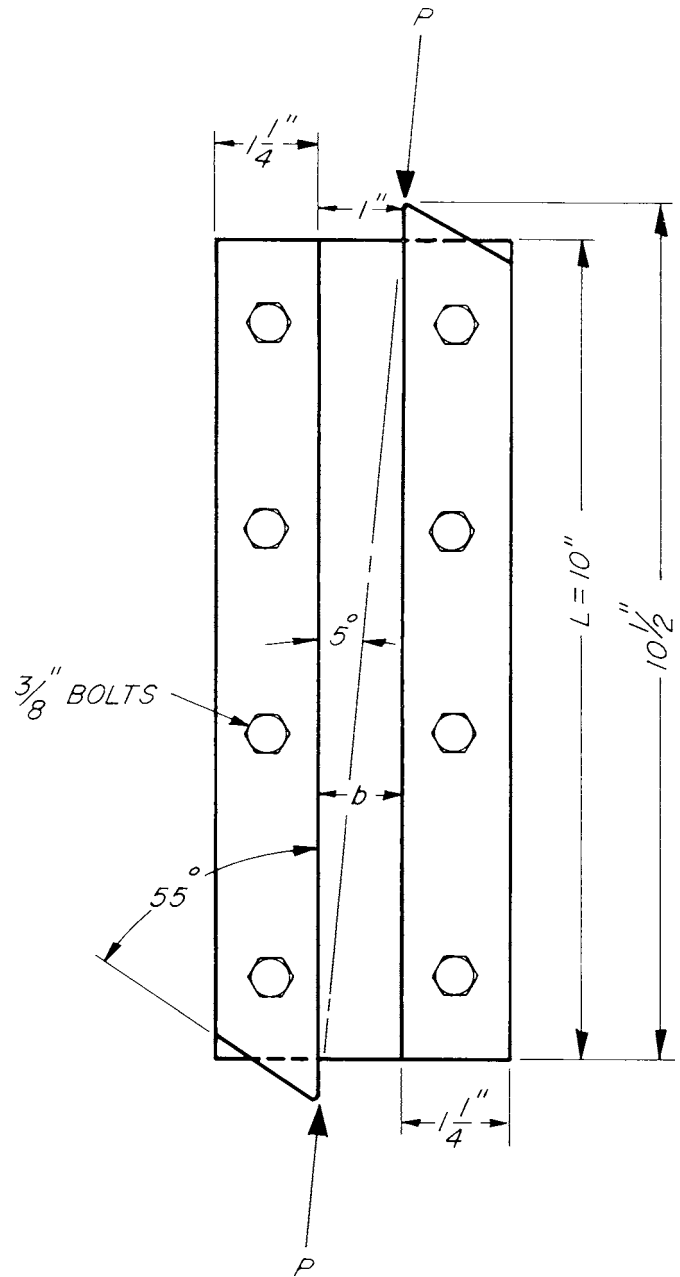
Detail of Loading Rails Used with Edgewise Shear Specimen
